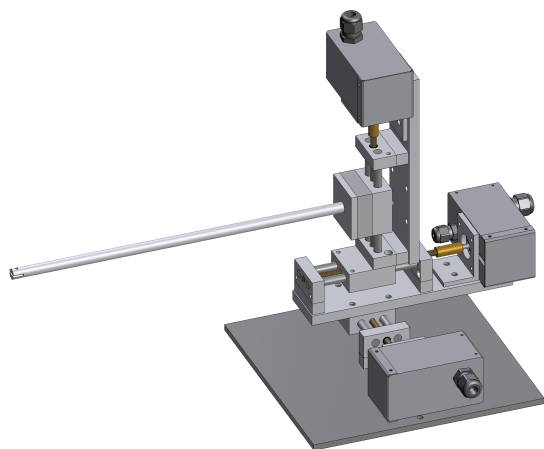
CAD image of the calibration robot with shielded stepper motors.
